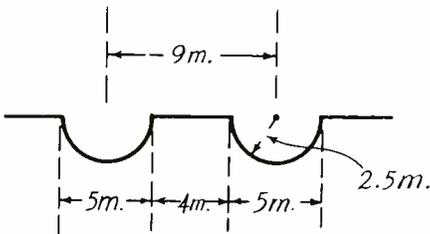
Cross section of a record showing typical dimensions for 112 lines per inch.
